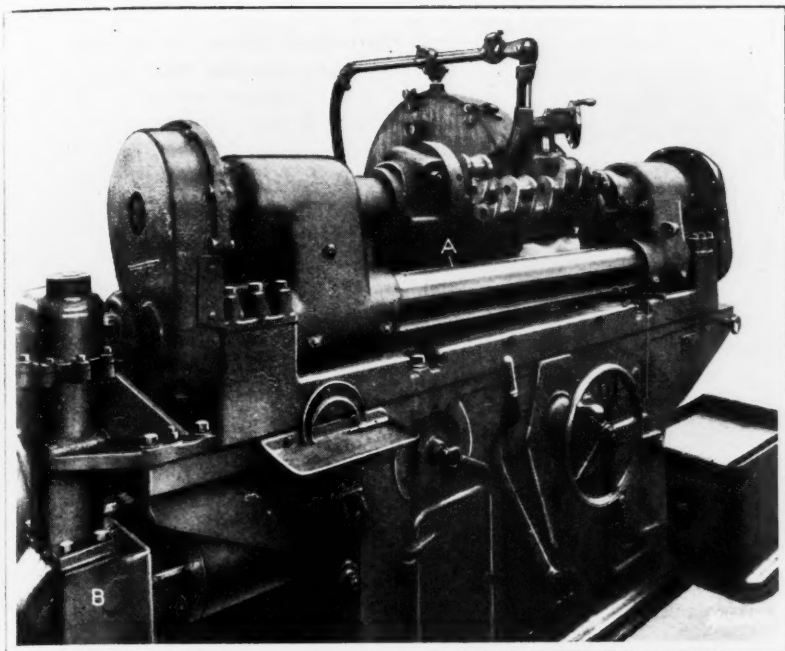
Grinding Machine equipped with Special Mechanisms for simultaneously grinding the Complete Contour of Two Crank-arms
